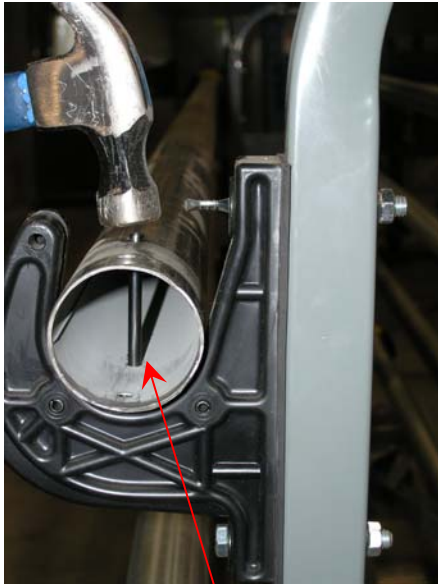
After inserting pin thru large hole Position Pin as shown
